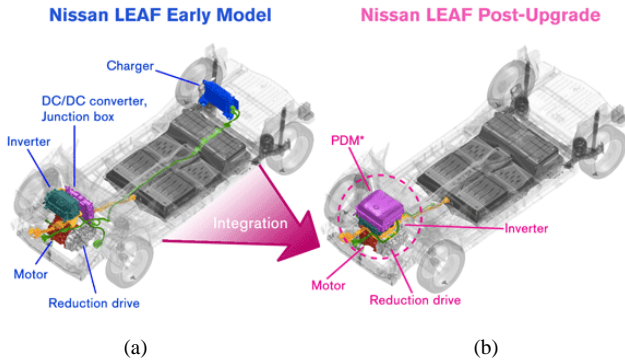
(a) Early distributed drive LEAF drivetrain, (b) Upgraded integrated drivetrain [43]
